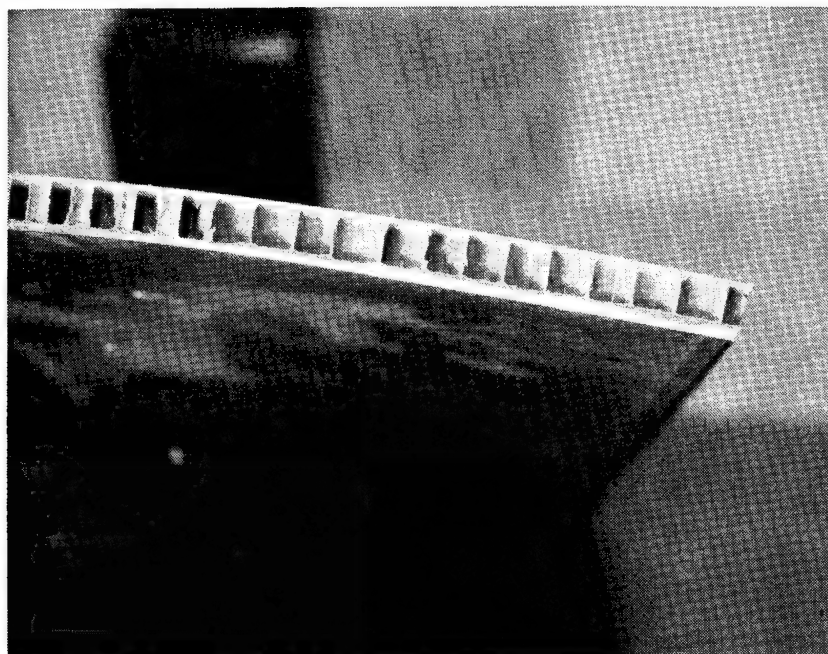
Adhesive Layer Showing Strain Gage Wire Location on Prototype
